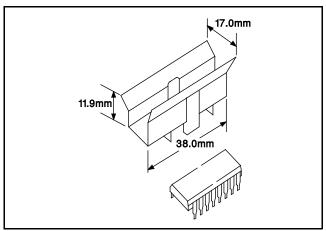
External Heatsink Mounting Example ($\theta_{JA} = 25^{\circ}C/W$)
